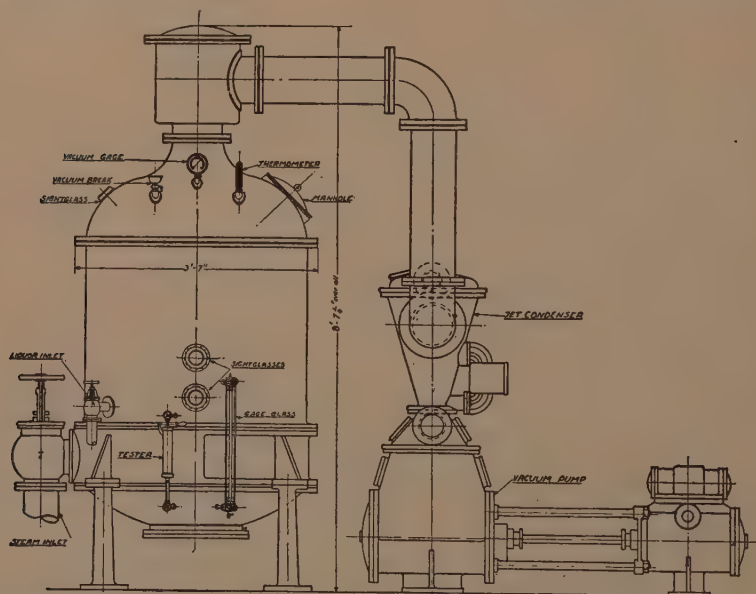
Sketch of vacuum pan with jet condenser and wet vacuum pump. (Courtesy, The Oscar Krenz Co.)
